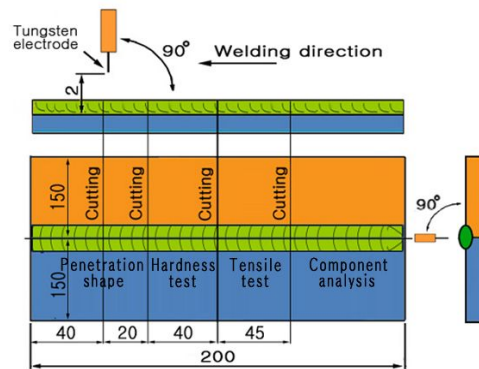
Distance between welding torch and tungsten electrode & Tested area of welded parts
